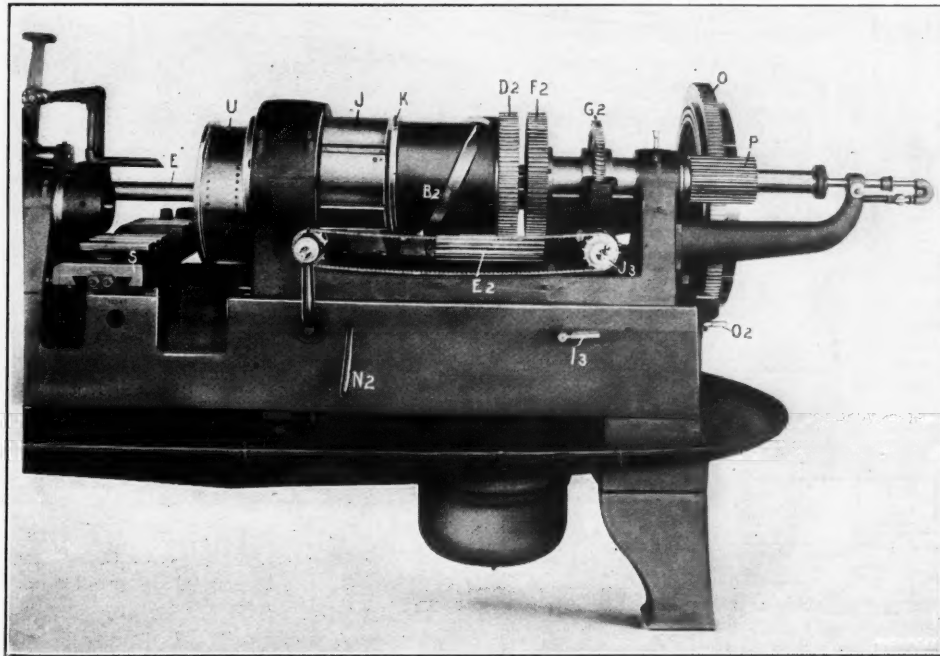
Turret End of 3¼-inch Cleveland Automatic Screw Machine
